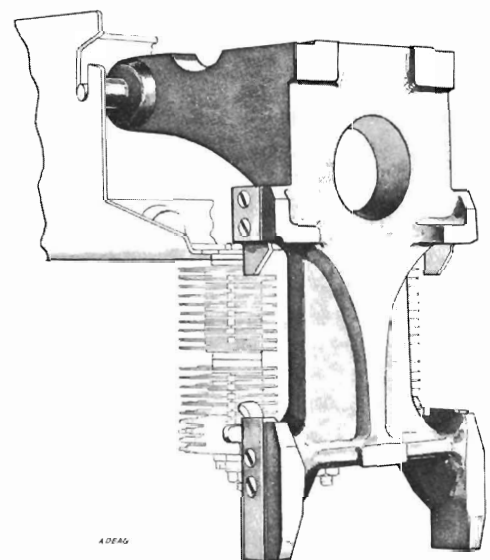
GAUGE LOCATED IN SHELF CRADLE
